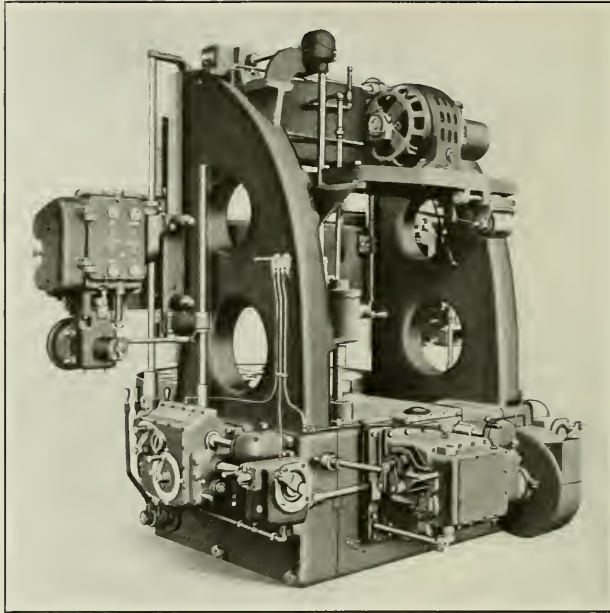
Rear View of the Colburn Heavy-duty Boring and Turning Mill
